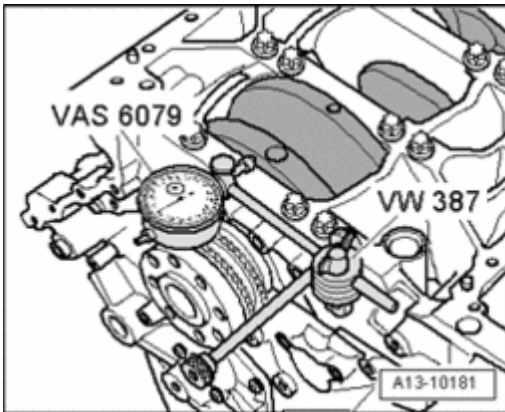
Attaching Dial Indicator VAS 6079 Together With Dial Gauge Holder VW 387 To Cylinder Block And Setting Indicator Against Crankshaft Counterweight
